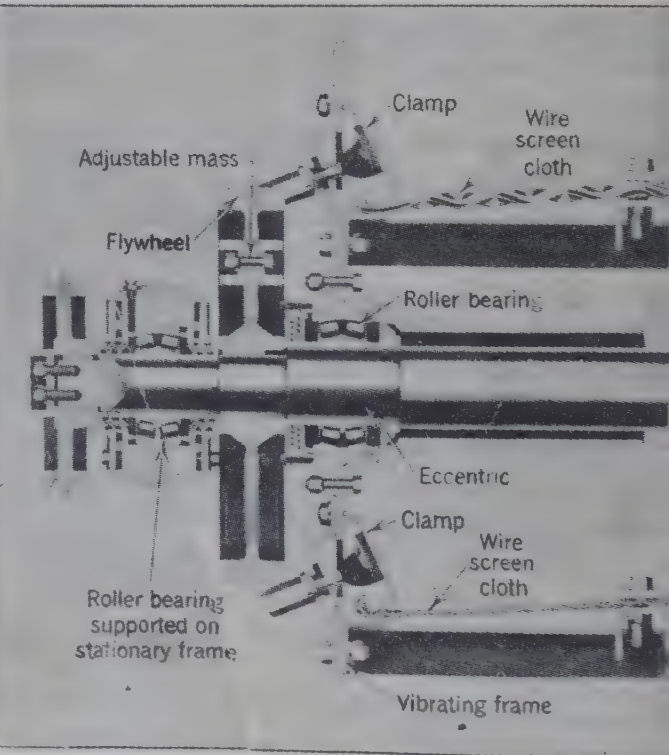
Sectional drawing of the mechanism of a mechanically vibrated screen. (W. S. Tyler Co.)
